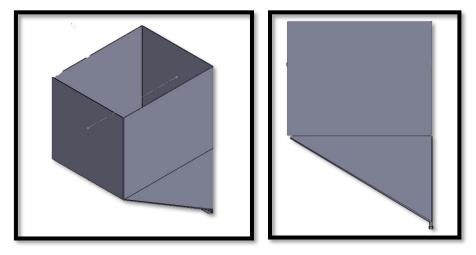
Feed hopper: Isometric view (left) & Front view (right)
